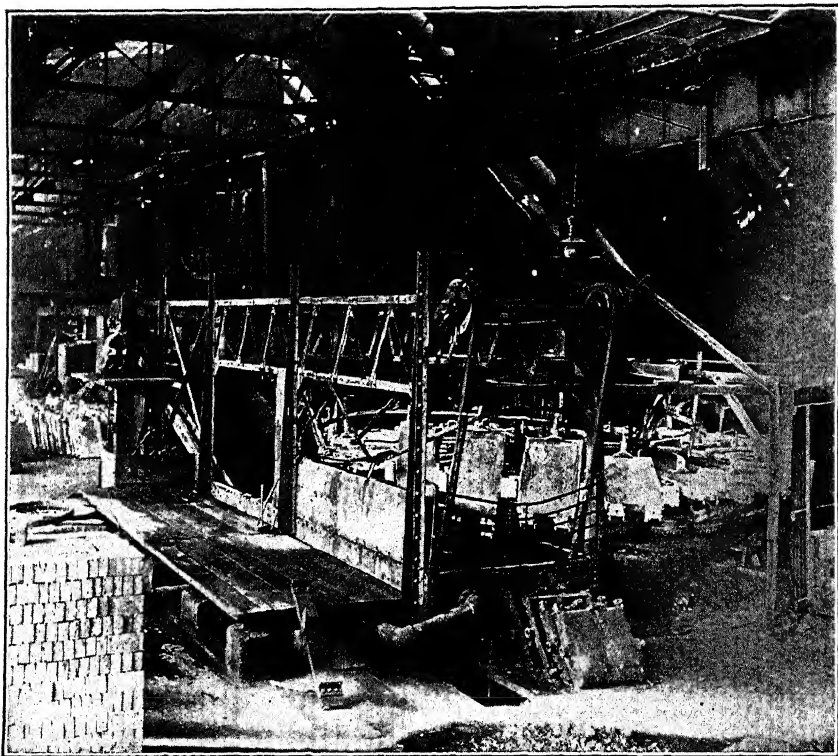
GENERAL VIEW OF CASTING MACHINE.
